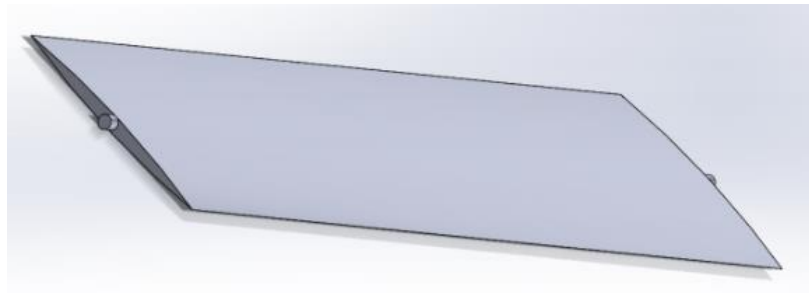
3D CAD drawing of Guide Vane done in SolidWorks
